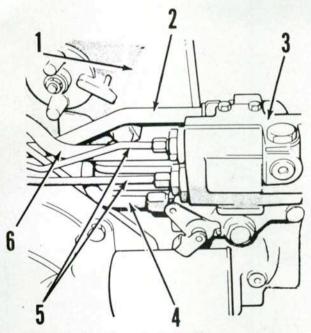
Priority valve assembly (3) is mounted on top of pump adapter plate.
